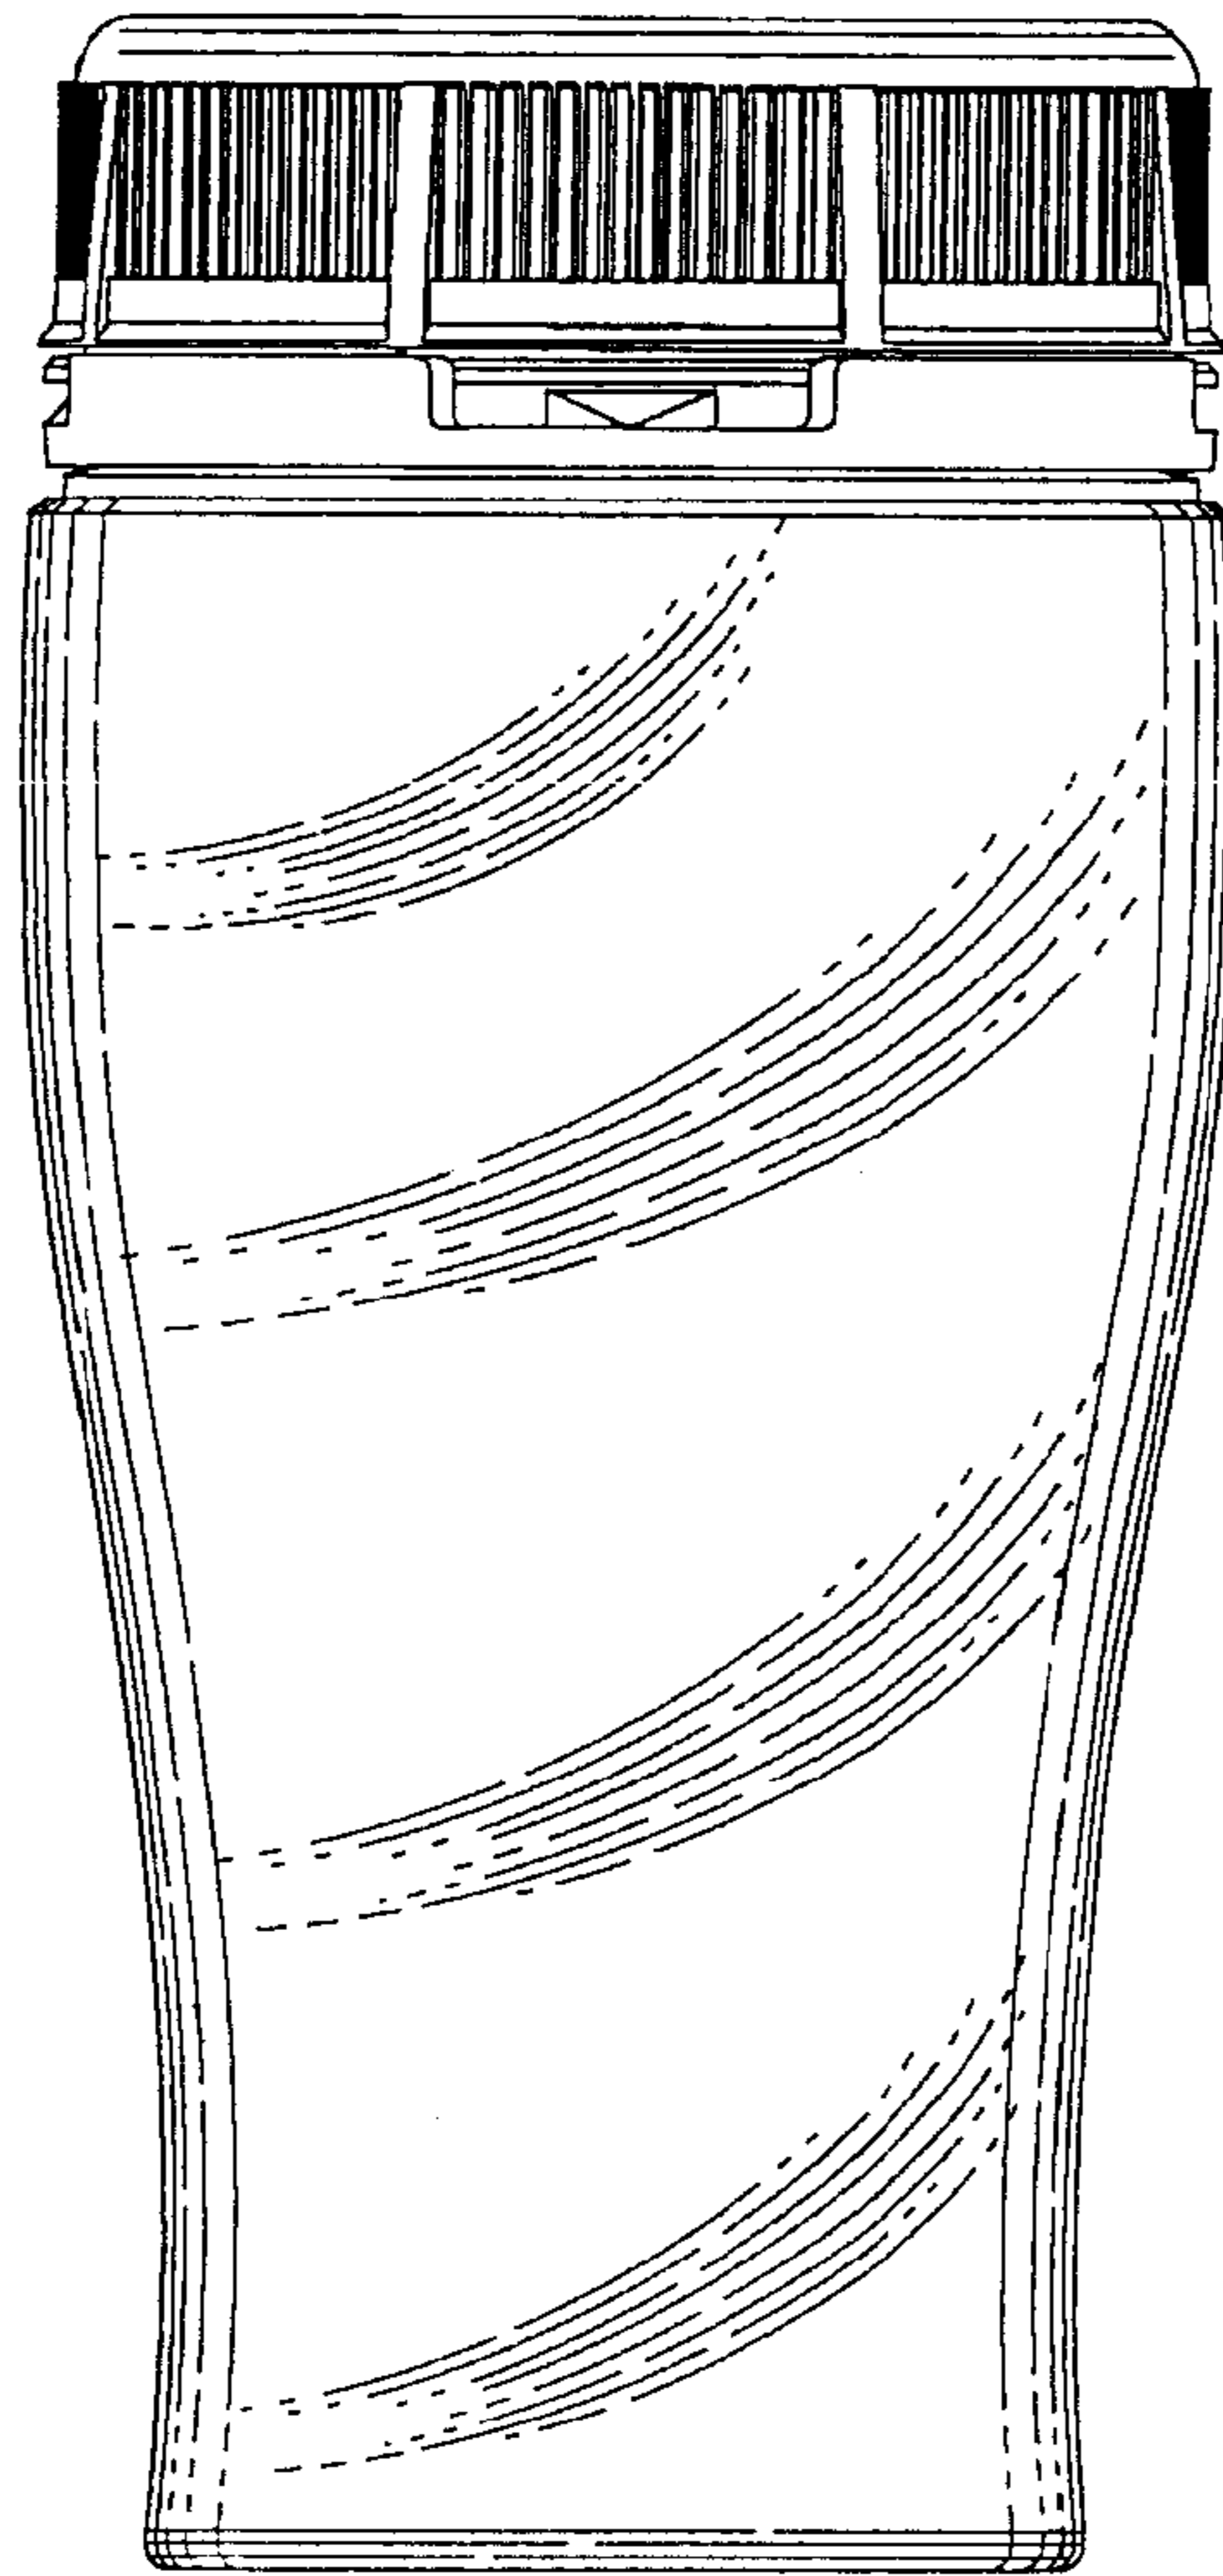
is a front elevational view of a second embodiment of a container and closure showing my new design;
